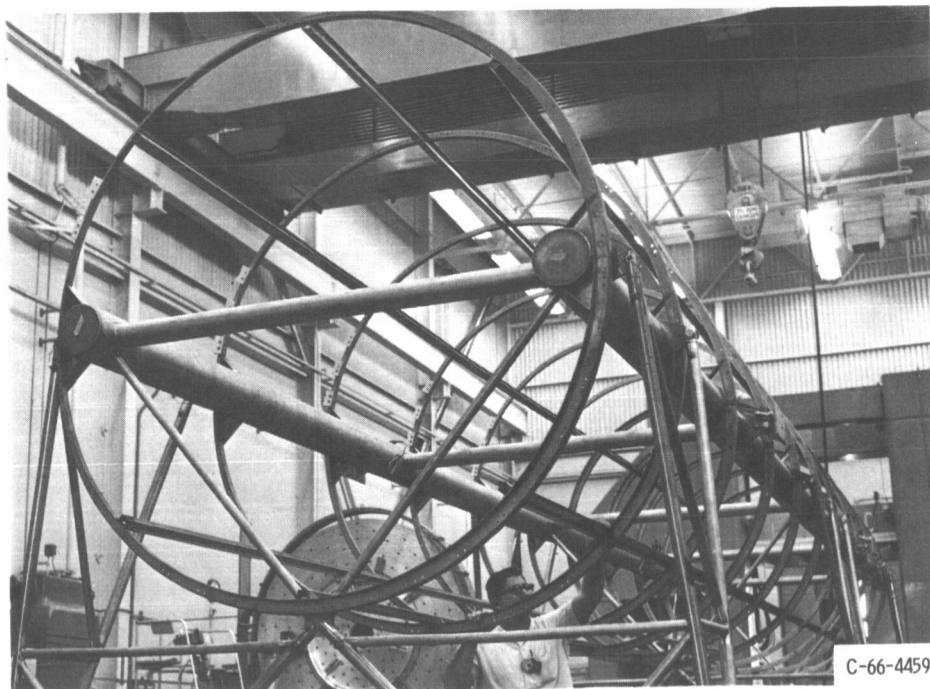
Preliminary assembly of support structure showing 11 Z-shaped circular frames.
